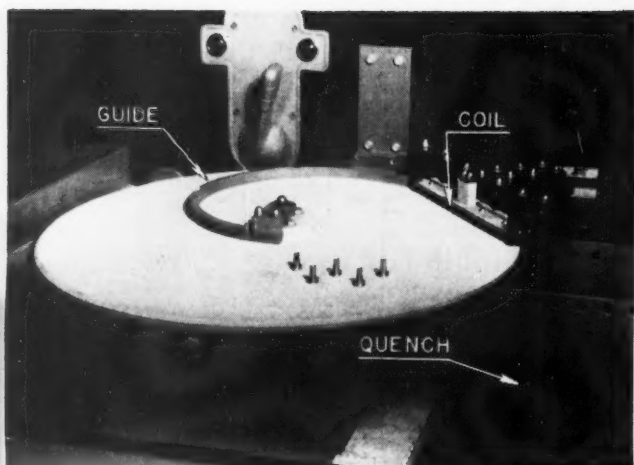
After screws are fed through the coil on this rotary table unit, they are dropped into a quench tank.
